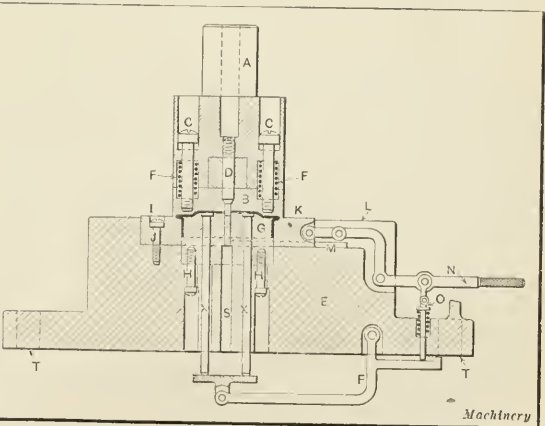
Upsetting, Flanging, and Perforating Punch and Die
